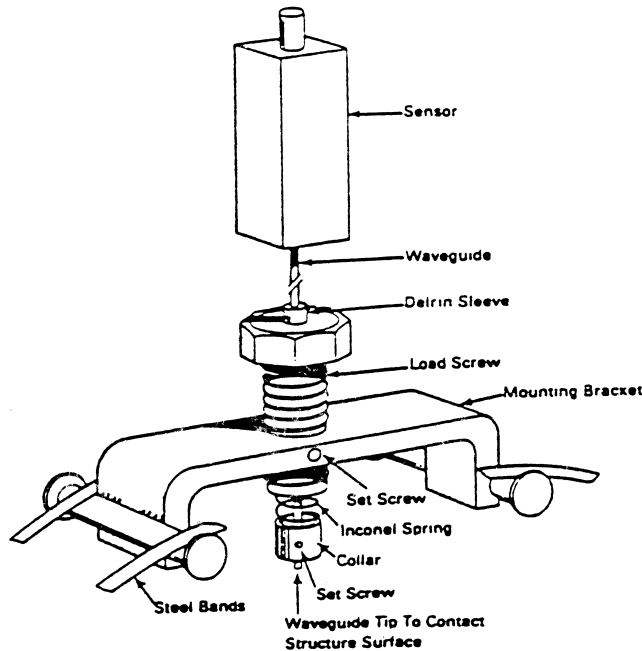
MOUNTING FIXTURE FOR STEEL WAVEGUIDE AE SENSOR
